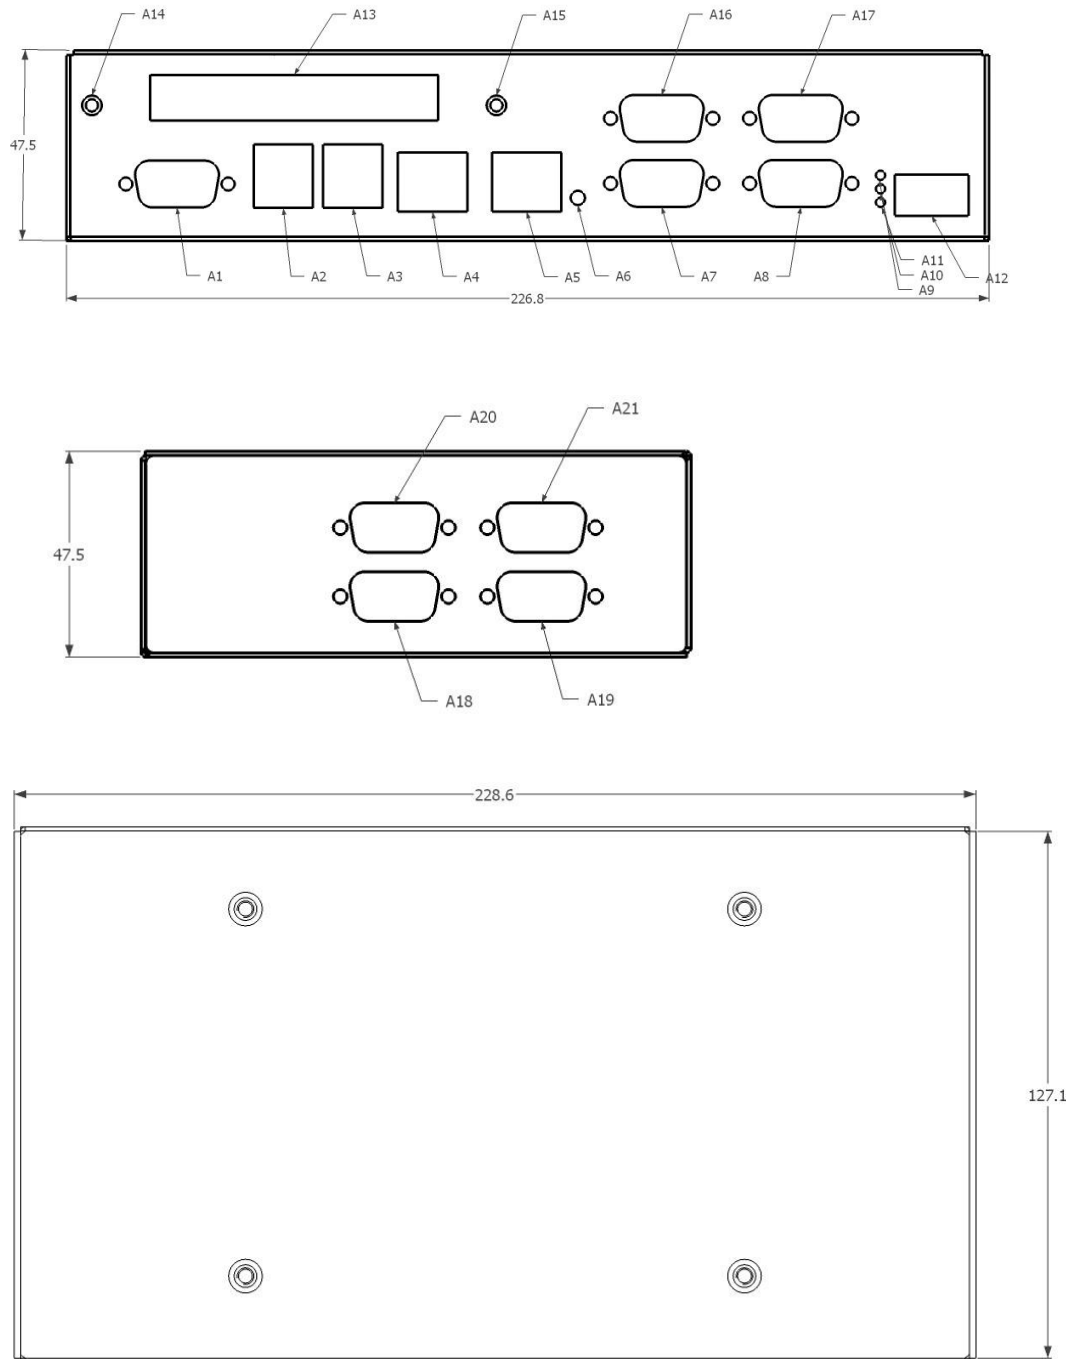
Three side view of the IPC/COMPACT6-ML enclosure (front, side, bottom)
